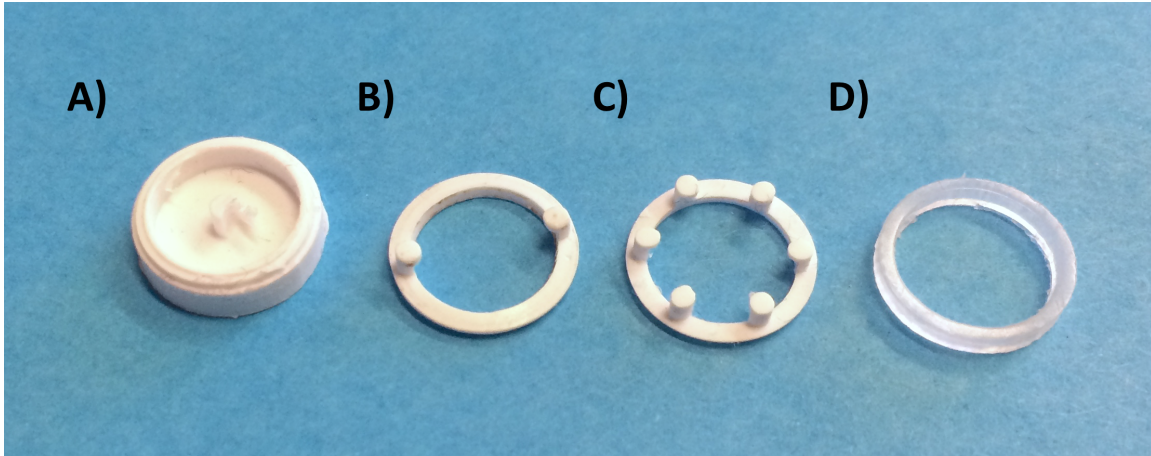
Scaffold Retaining Rings: *A)* The first machining operation resulted in the blank shown, which was then inverted on the locating post before the removal clips were machined from the other direction. *B)* Two clips allow removal; their section is shown in Figure 4-16-D. The presence of these clips required an insertion tool with clearance notches, shown in Figure 4-19-B. *C)* A prototype with six clips was fabricated to evaluate the tilting ring variant shown in Figure 4-11. *D)* The existing LiverChip retaining ring consists of a polypropylene annulus with a rectangular cross section.
